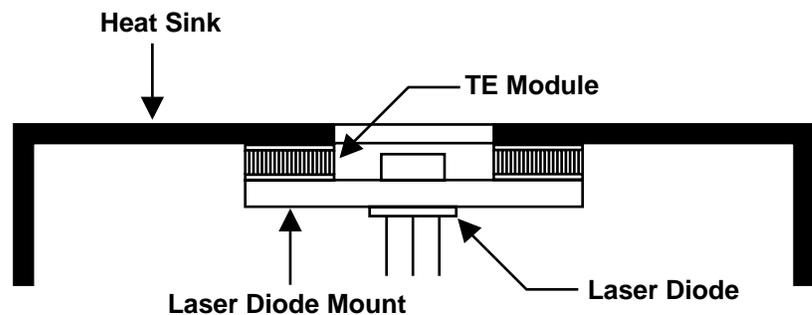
Mounting arrangement of a TE module, heat sink and laser diode
